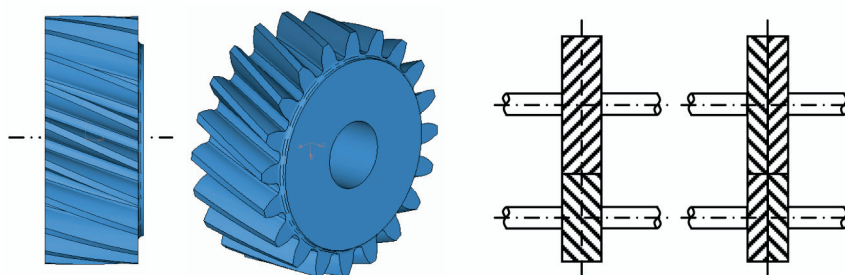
(a) Helical gear. (b) Herringbone gear
